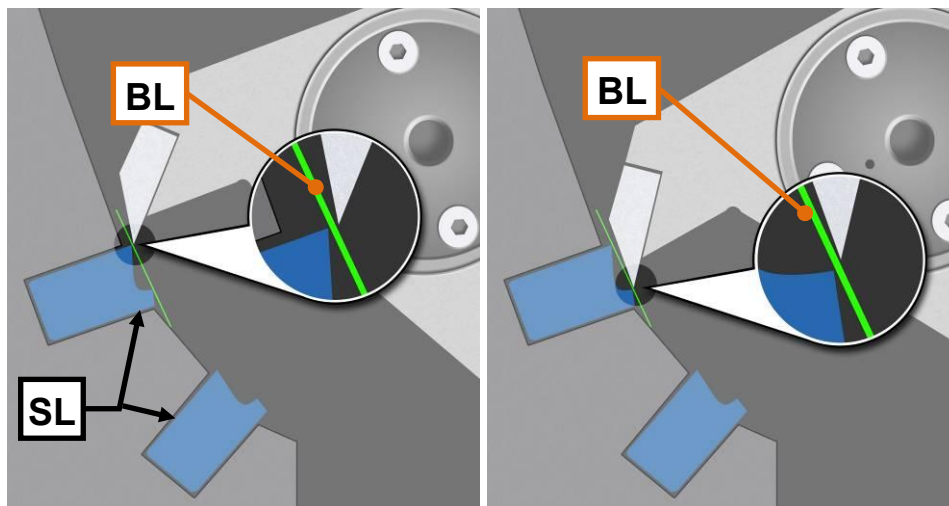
Cutting gap inspection for the parallel cutting rotor
